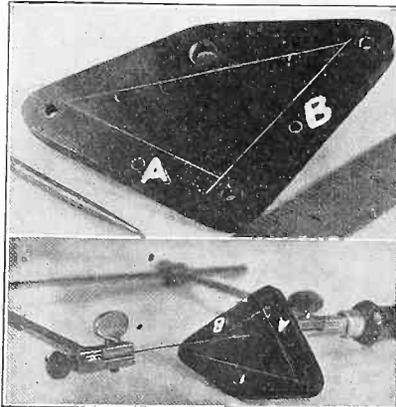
, the two new mounting holes are shown, marked A and B. Also note that the hole through which the rotor shaft of the condenser extends is not to be disturbed. Using one of the former mounting holes as a starting point, insert a fret saw and start cutting in the direction of one line of the triangle. If the blade is not thin enough, use a drill to make the hole large enough for insertion of the blade, as of a hacksaw. When the triangle is removed in this manner the skeleton end-piece is replaced on the condenser and the instrument is mounted on the panel, in which new mounting holes must be drilled.
